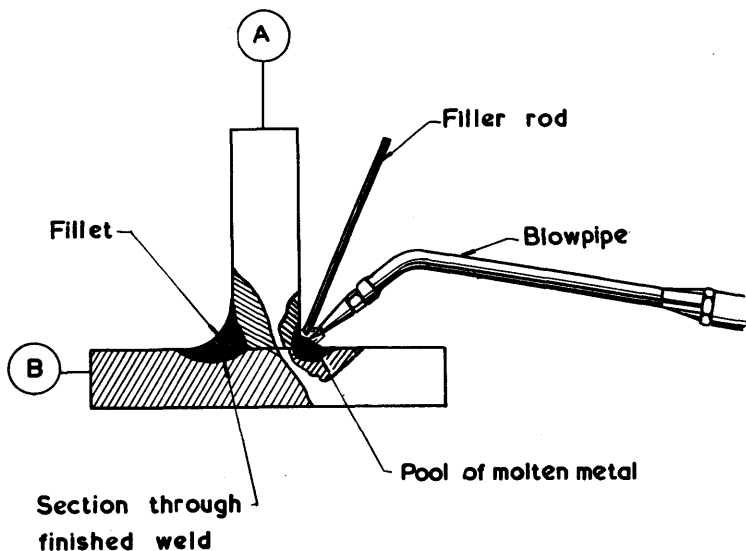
Oxy-Acetylene Welding.
